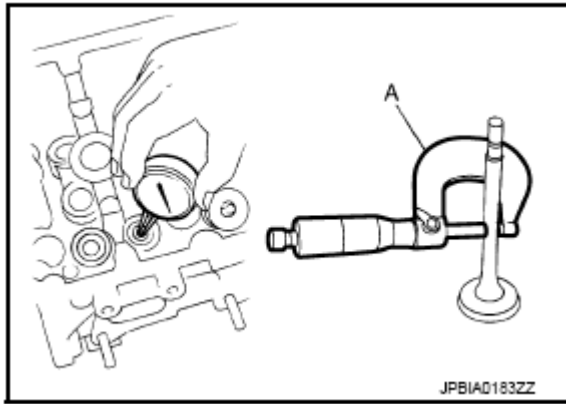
Measuring Valve Guide Inner Diameter Using Bore Gauge And Valve Stem Diameter Using Micrometer
